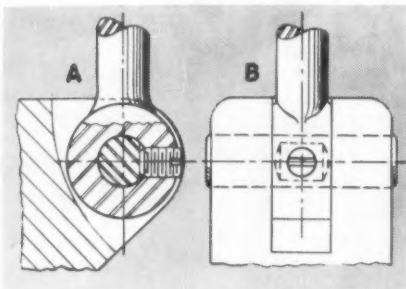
Drawing of swinging bolt clamp assembly utilizing a straddle type of bearing.
